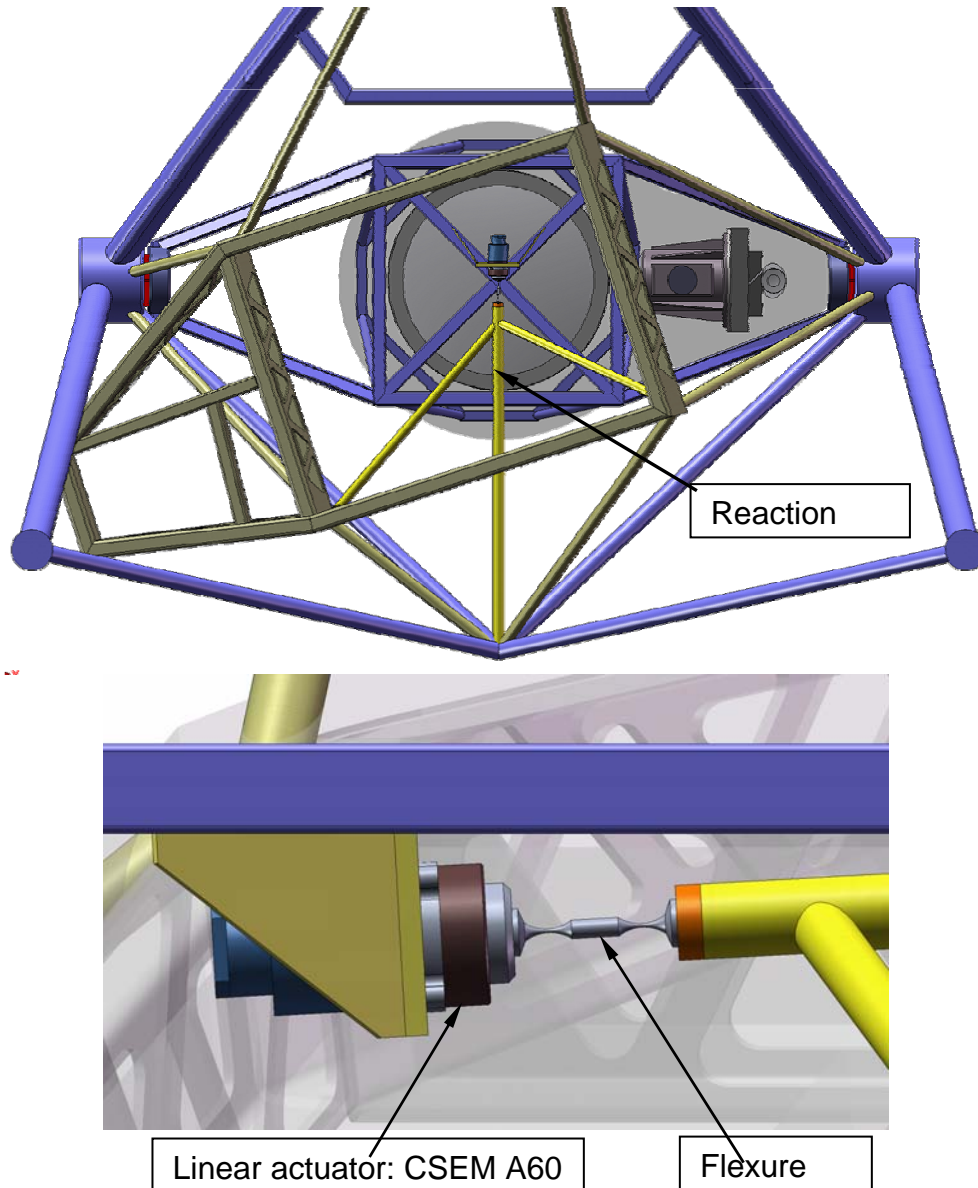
(top panel): View of the LLT space frame/rotation fixture from below. The linear actuator pushes against a reaction truss designed to minimize bending or buckling. (bottom panel): Magnified view of the linear actuator and flexure coupling to the reaction truss.
